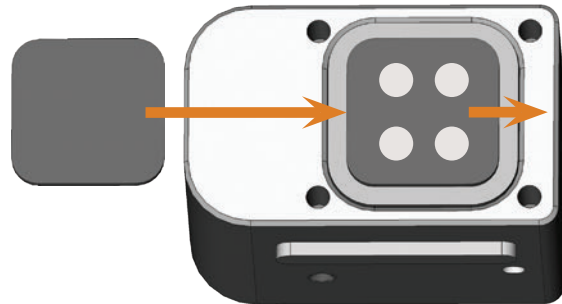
NEW TOOL MAGAZINE INSERT (ON THE LEFT, WITHOUT DRILLINGS) REPLACING THE OLD INSERT (ON THE RIGHT, WITH DRILLINGS)
